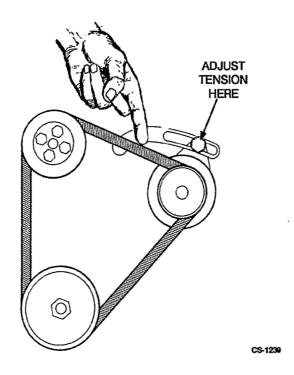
3. PUMP BELT ADJUSTMENT
